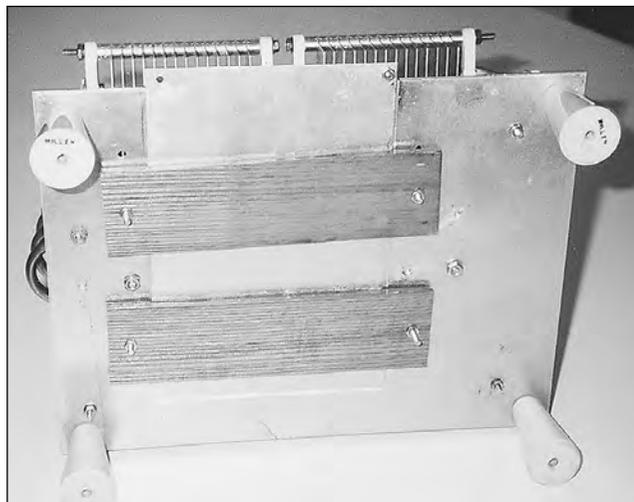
Bottom view of subchassis, showing the two strips of wood ensuring mechanical stability of the C3 capacitor assembly.
